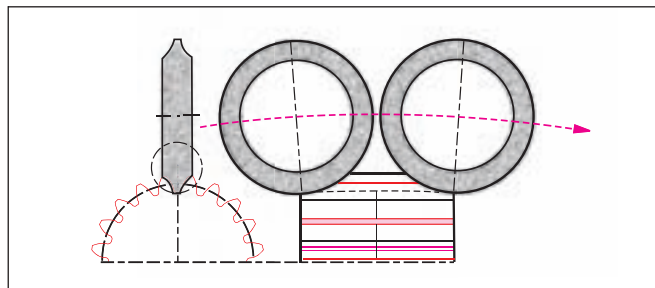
Form grinding wheel path for a convex crown. Form grinding wheel path required to create a symmetrical lead crown using the conventional crowning technique of radial displacement of the grinding wheel, relative to Z axis position along the gear face width.
